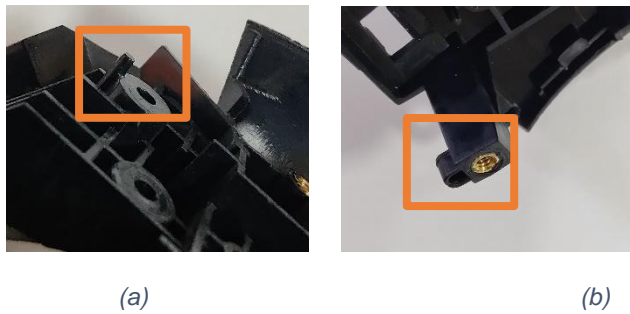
Guiding pin on Base of housing Hole in Lid of housing
